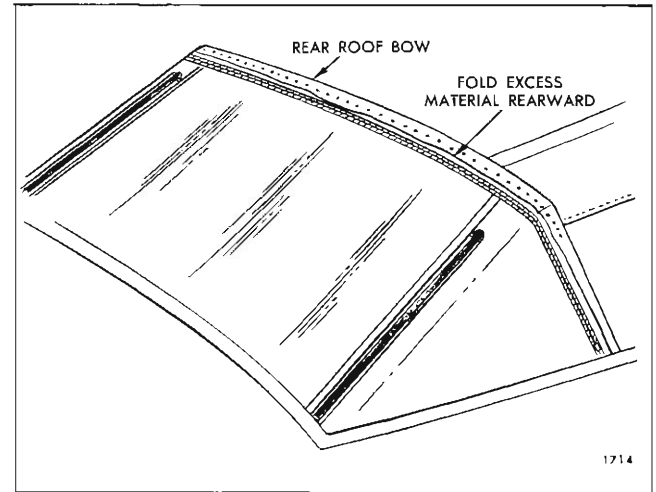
Back Curtain Installation at Rear Roof Bow
